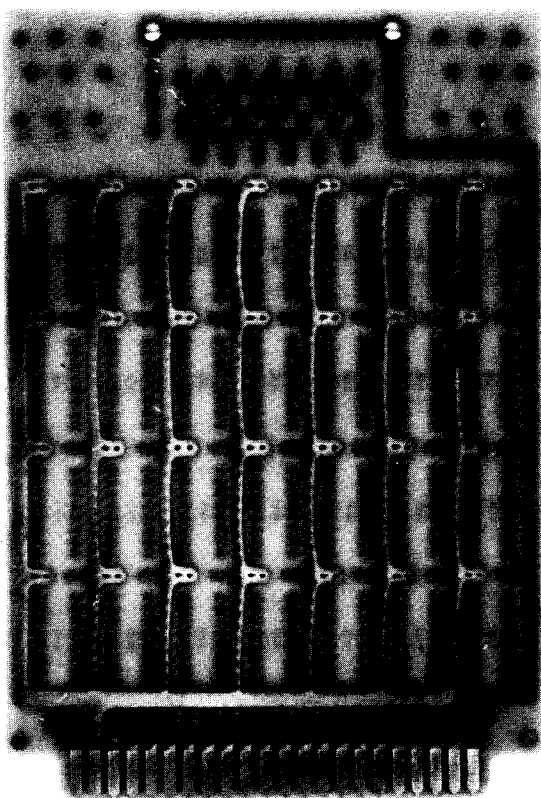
28 DIP Socket PC Cards (Type A and B)
